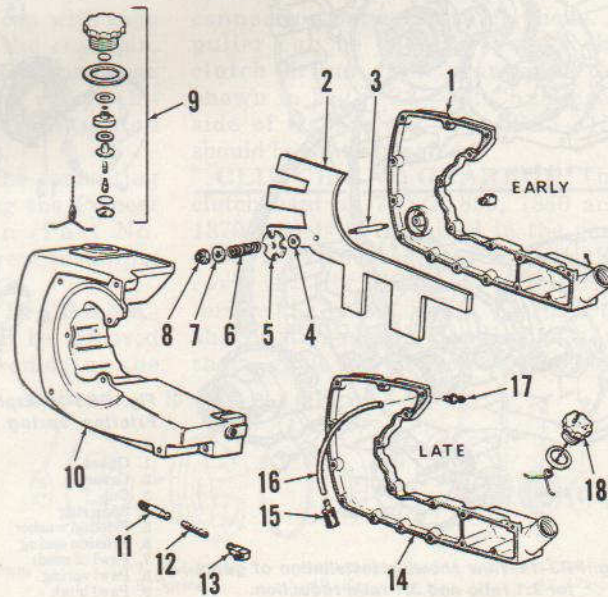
Exploded view of the rear handle and air box typical of all models. A choke is used on some models instead of fuel primer pump (1 thru 11).
